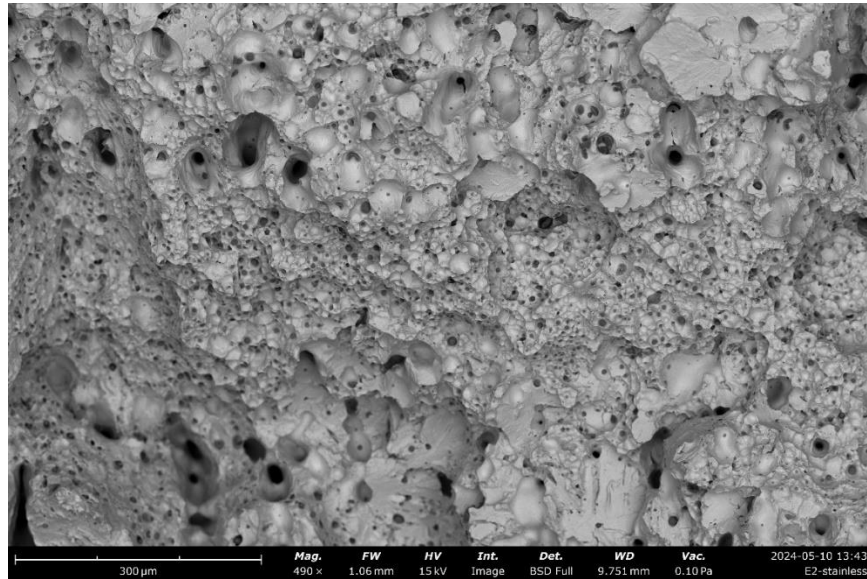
The fracture surface of 17-4 PH honeycomb structure
